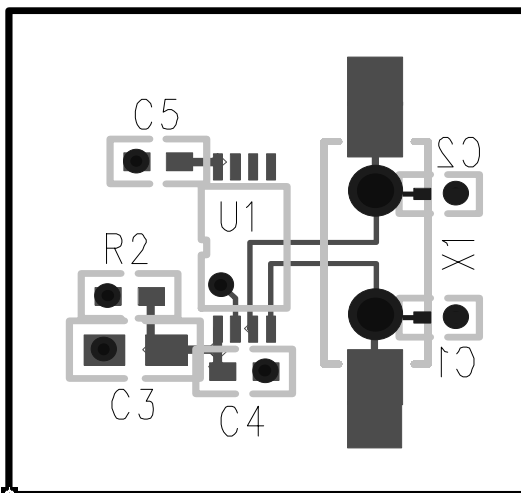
B. ICS843001 PC BOARD LAYOUT EXAMPLE
